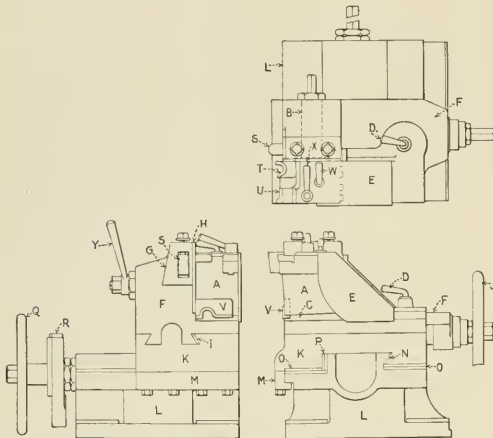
Details of Turret Tool Post, Revolving in Vertical Plane, Designed for Use on Niles-Bement-Pond Wheel Lathes.
